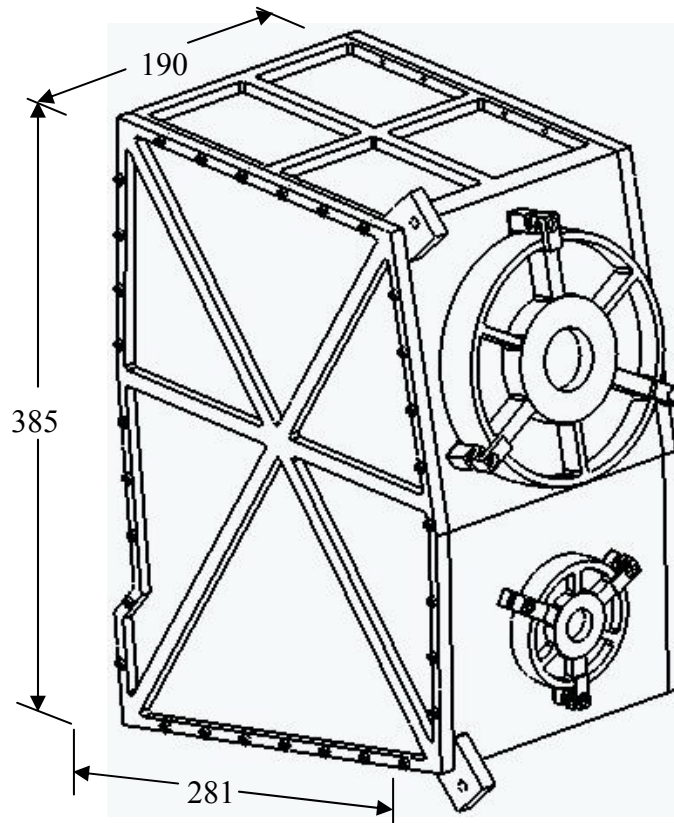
Final telescope assembly and telescope frame dimensions (in mm)
